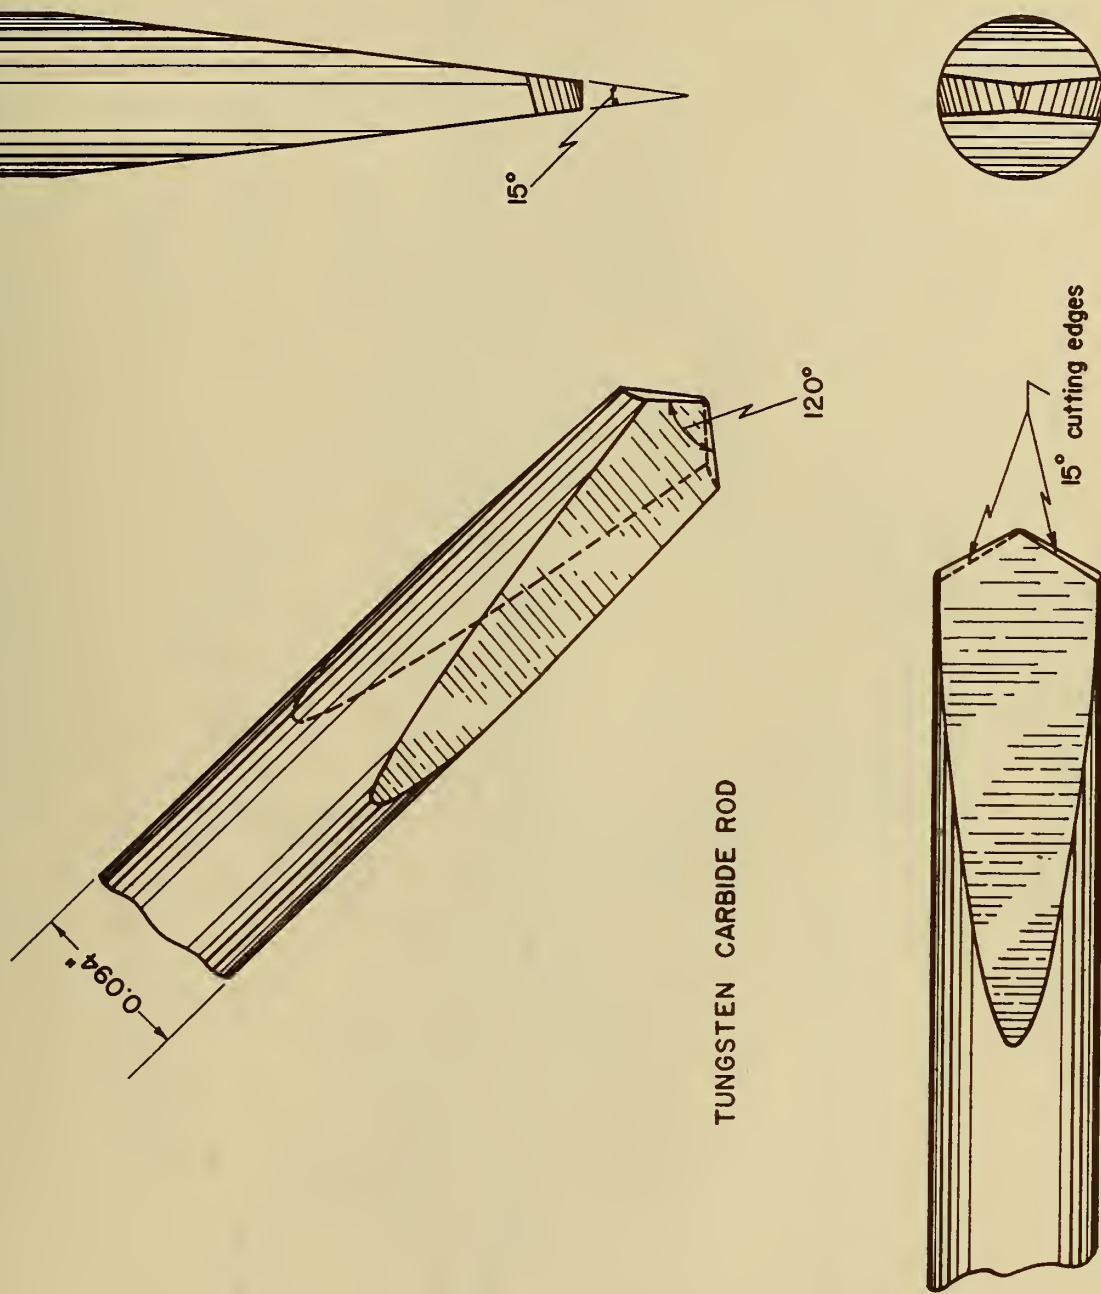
Tungsten carbide tool for drilling the longitudinal hole in the tungsten tube furnace.
